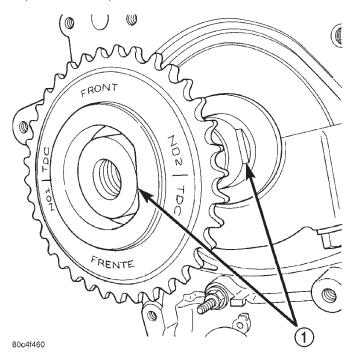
Balance Shaft Sprocket Alignment to Crankshaft
